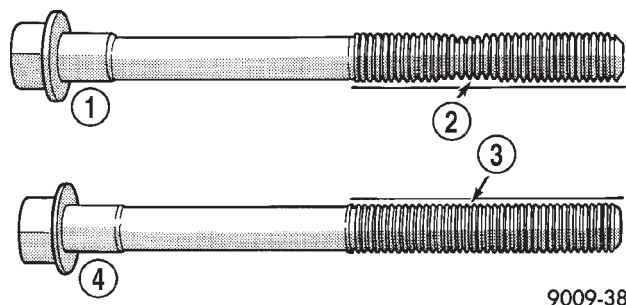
Checking Cylinder Head Bolts for Stretching (Necking)
